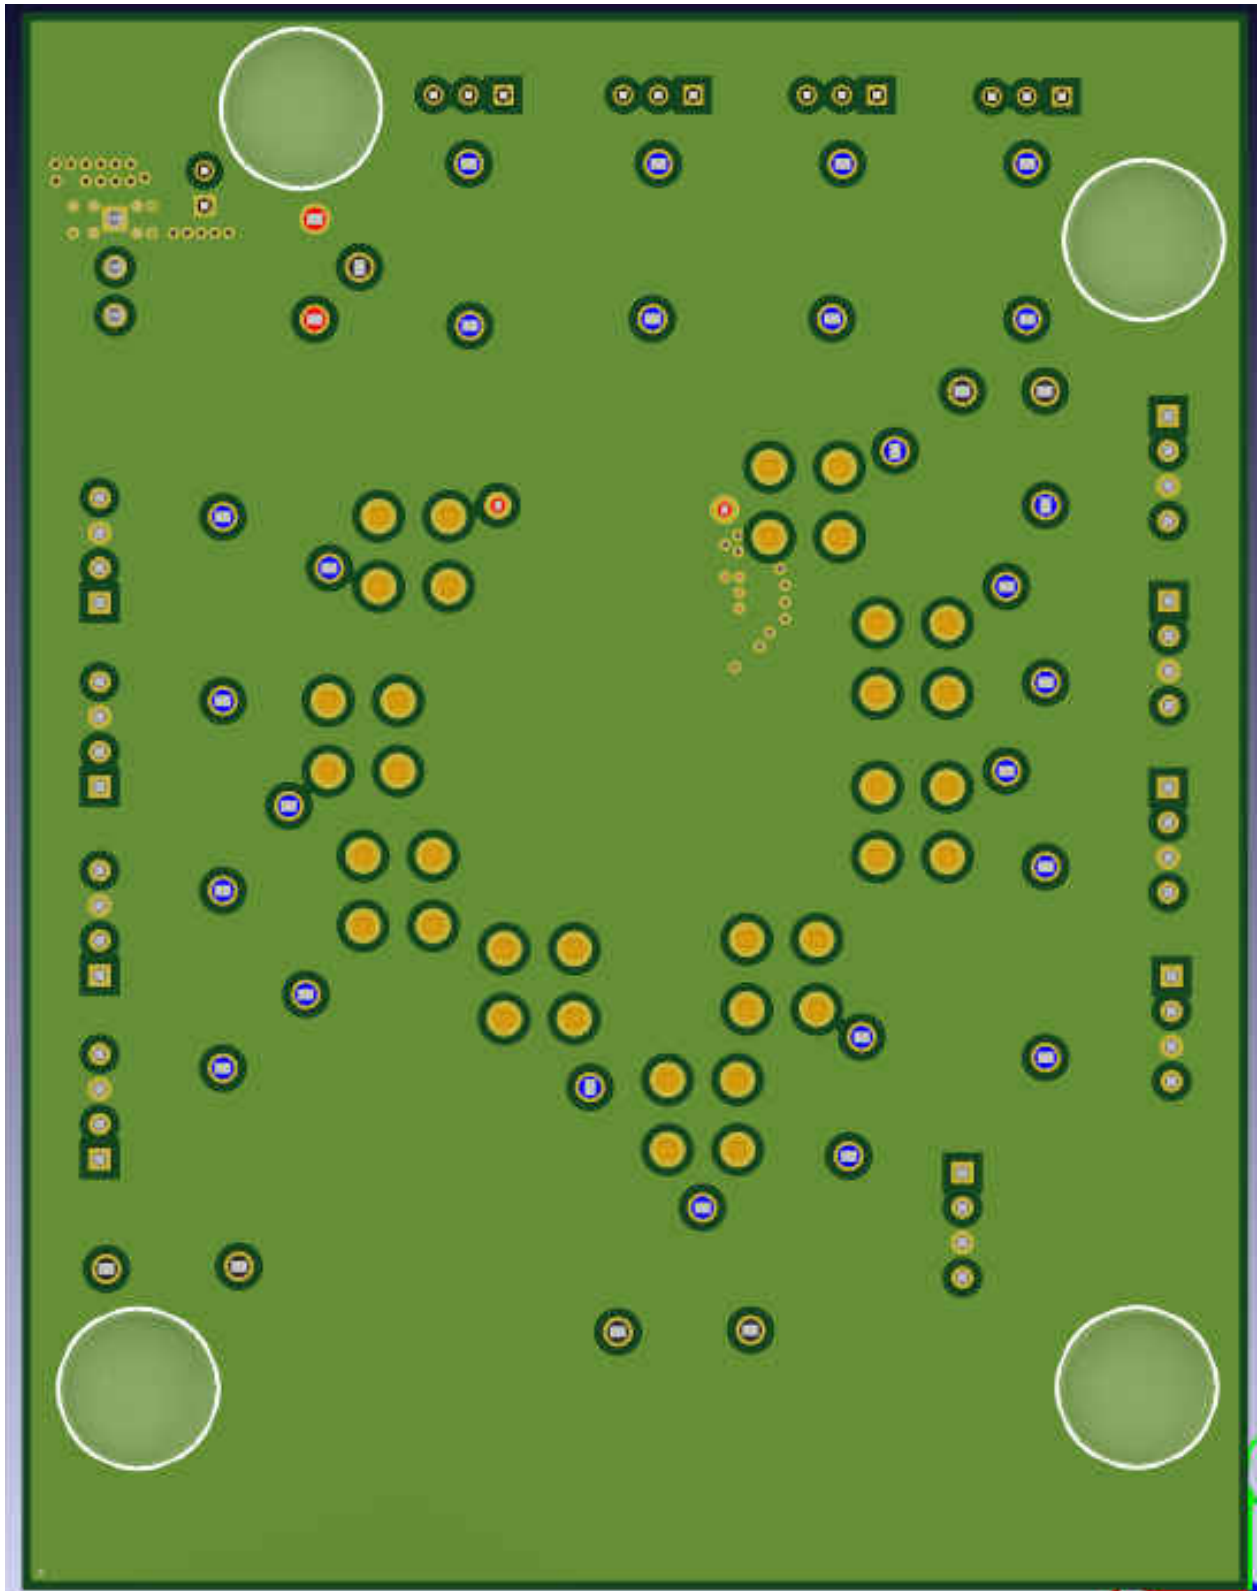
Bottom View Illustration of the TMUX7208EVM Layout
